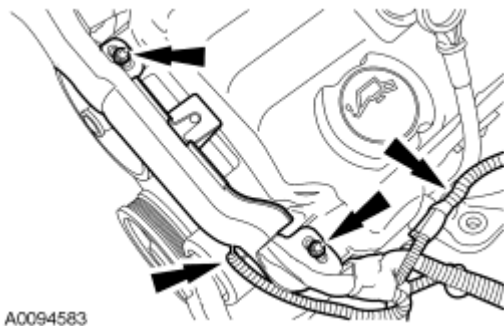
Locating Camshaft Position Sensor (CMP) Electrical Connector
